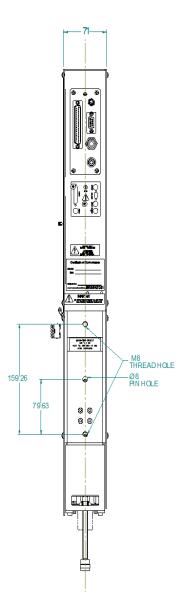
Rear view of Actuator, showing Mounting Surface, Bolt and Guide Pin locations 2000Xc AEC Actuator
